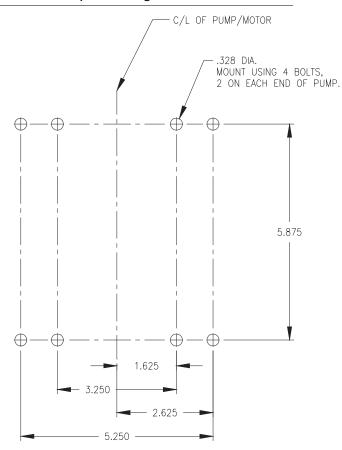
Sidekick Pro™ ISO Pump Mounting Bracket Bolt Pattern
